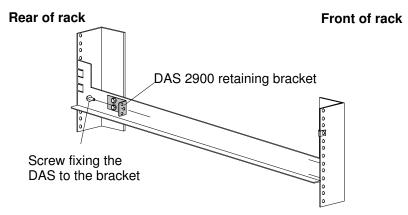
Position of the retaining bracket to the DAS 2900 rails
